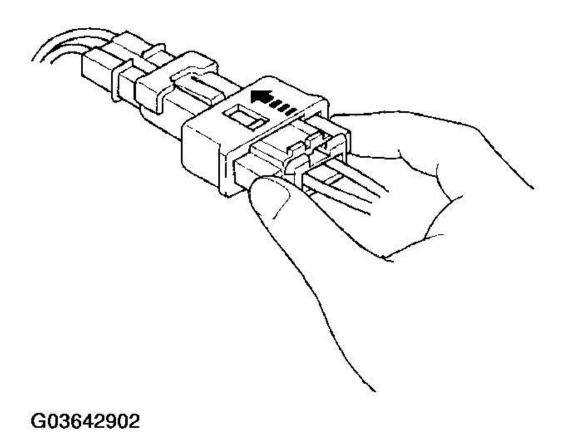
Identifying Connector Halves Completely Connected Courtesy of AMERICAN HONDA MOTOR CO., INC.
